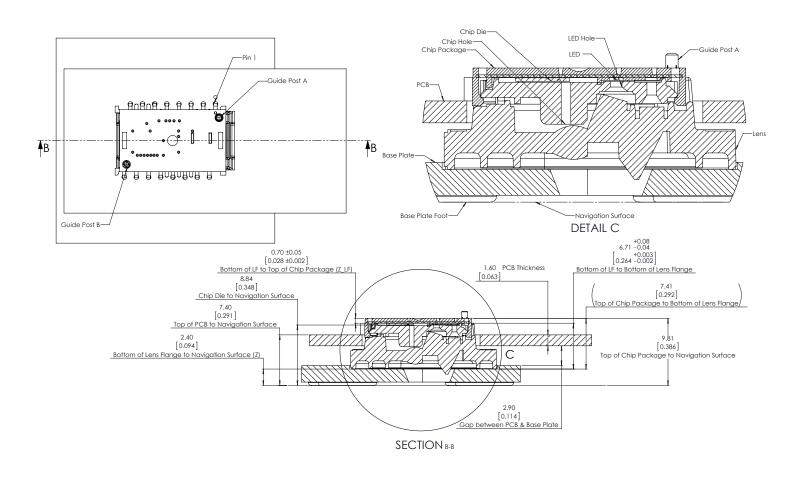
Assembly drawing of PMW3360DM-T2QU and distance from lens reference plane to tracking surface (Z)
